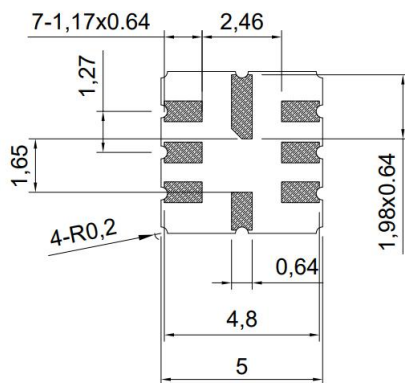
Sensor dimensions and recommended PCB pad dimensions
